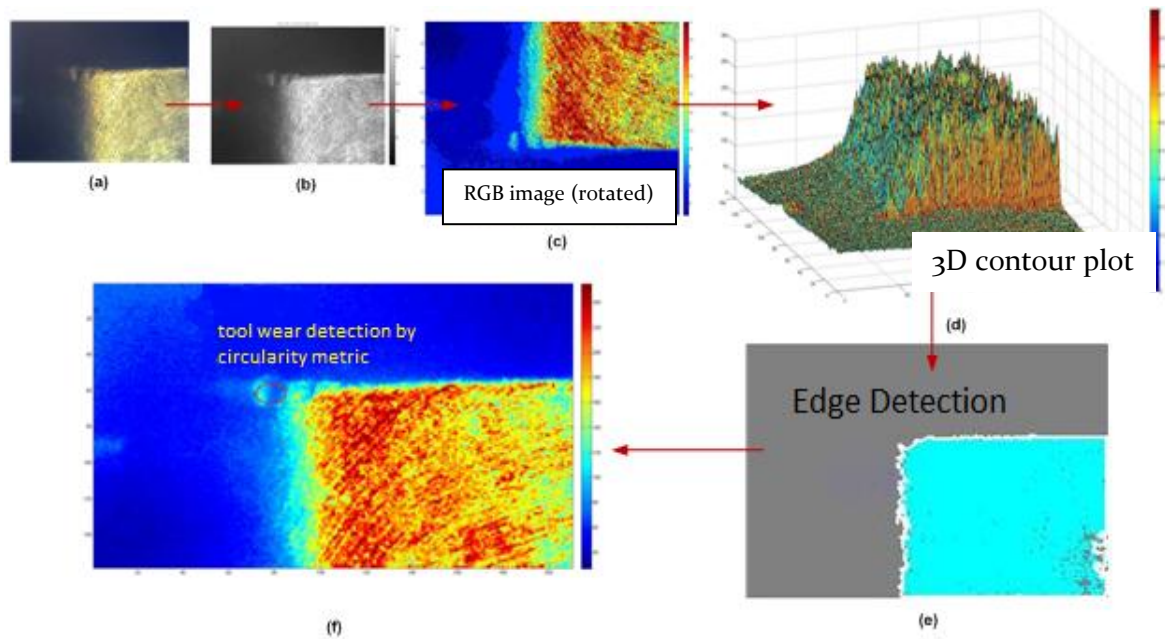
Image processing result sample for measuring tool wear [52]
